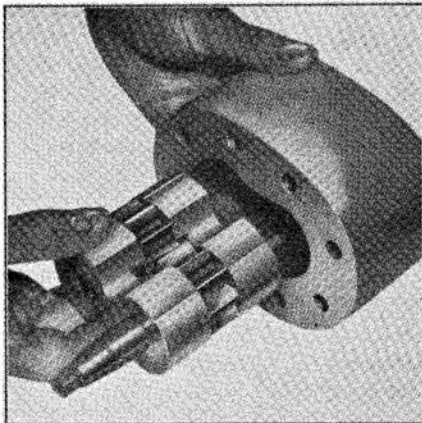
Remove and install the pump gears and bearings as an assembly as shown.
